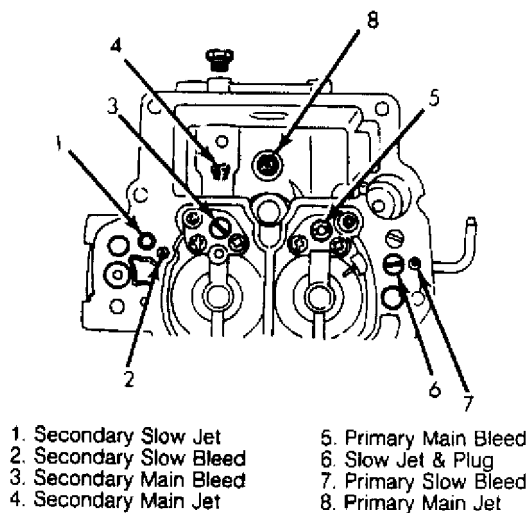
Locating Air Bleeds & Jets (Main Body)
